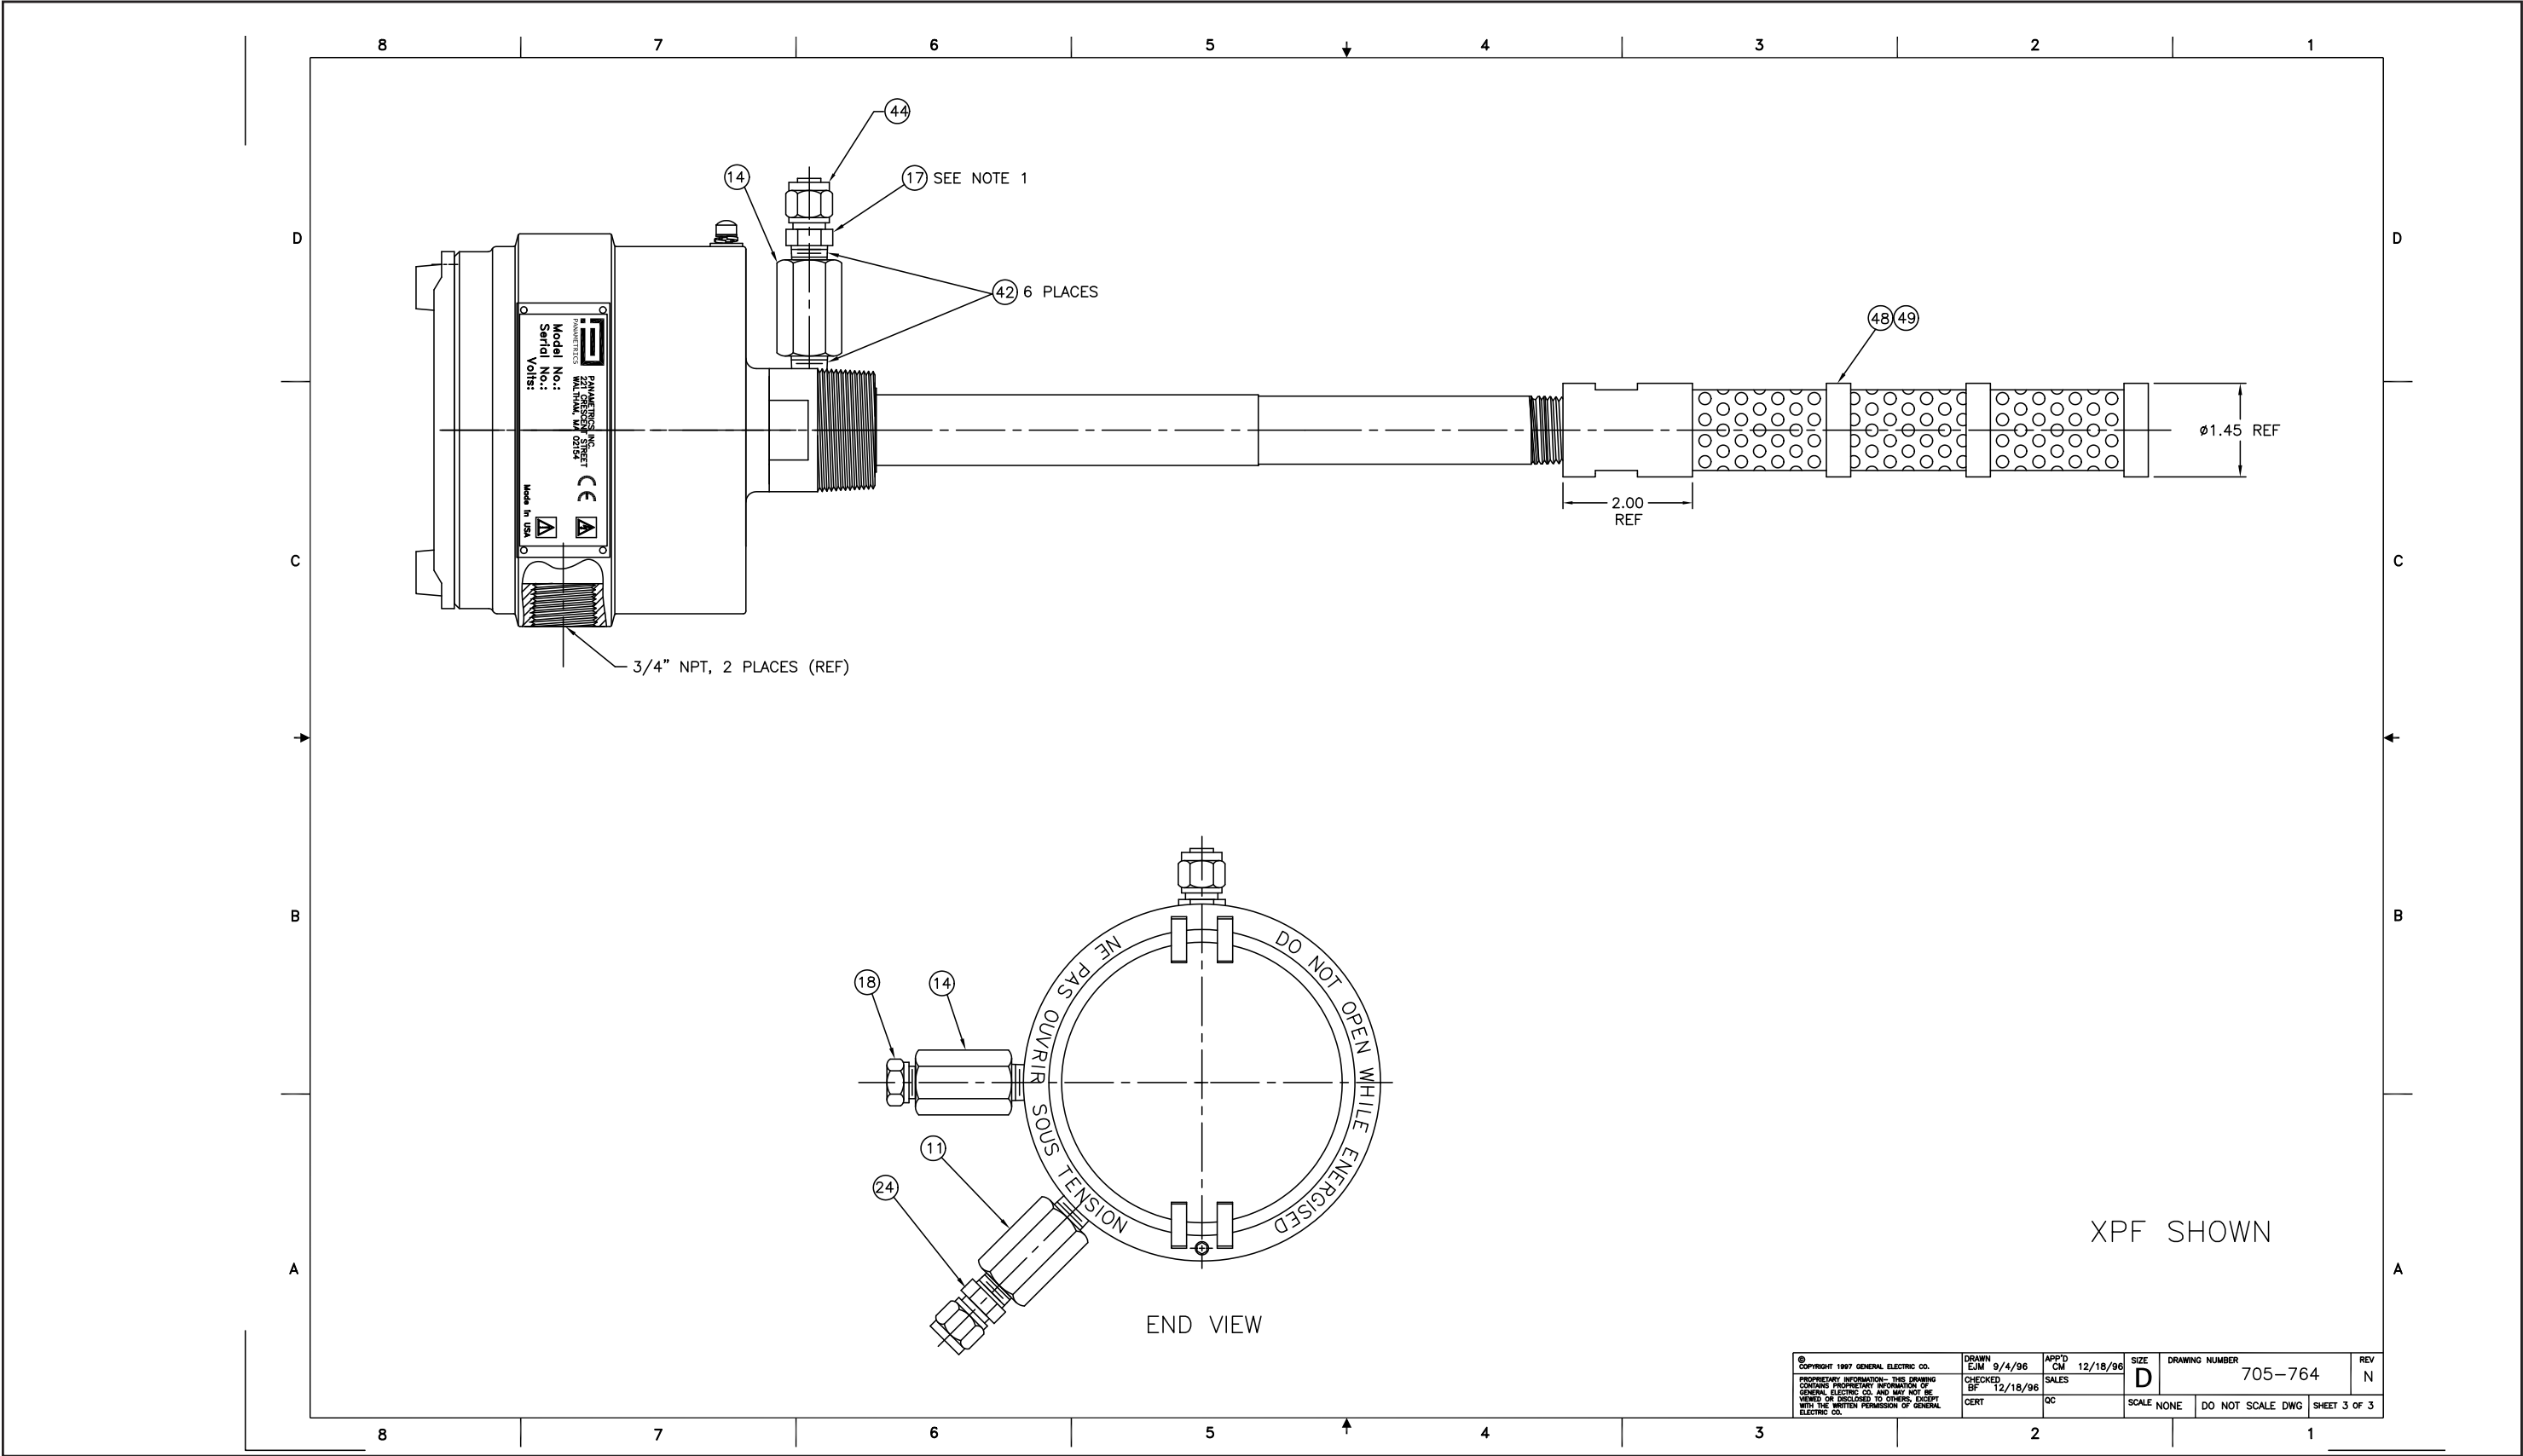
FGA 311 Explosion-Proof Assembly (Drawing 705-764_rev N, Sheet 3)
